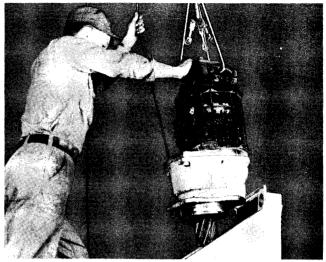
REMOVING MOTOR AND GEAR BOX
